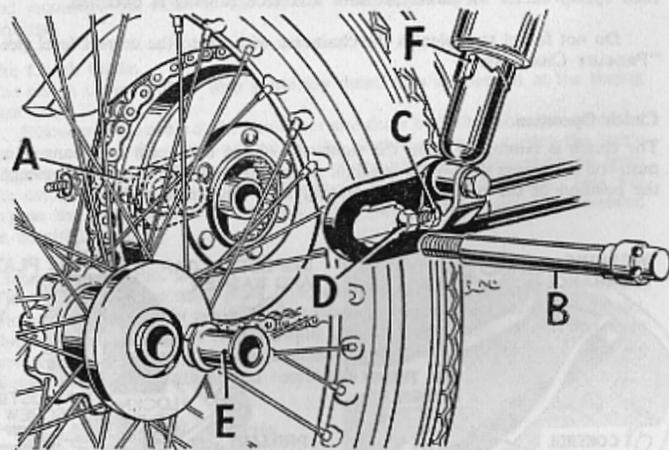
Rear wheel removal, also showing the position of the adjuster bolts for moving the wheel. (Speedometer drive not shown).
